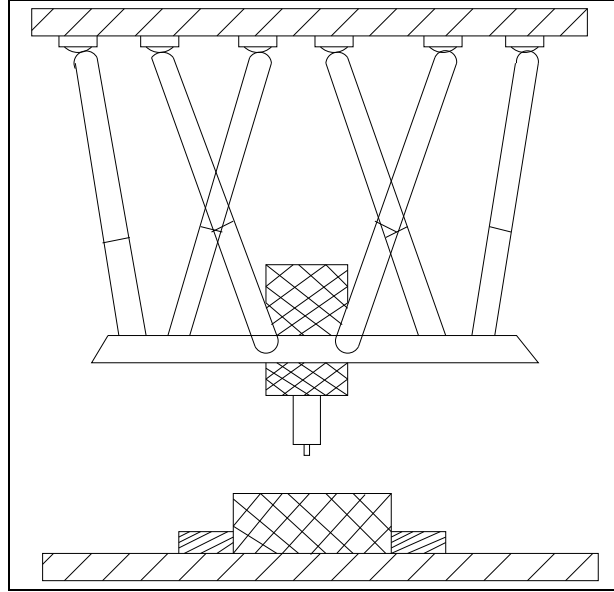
Schematic of a six-axis Hexapod machining center.
